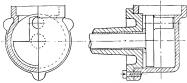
Form of crankcase commonly employed on simple engines with overhung cranks.
